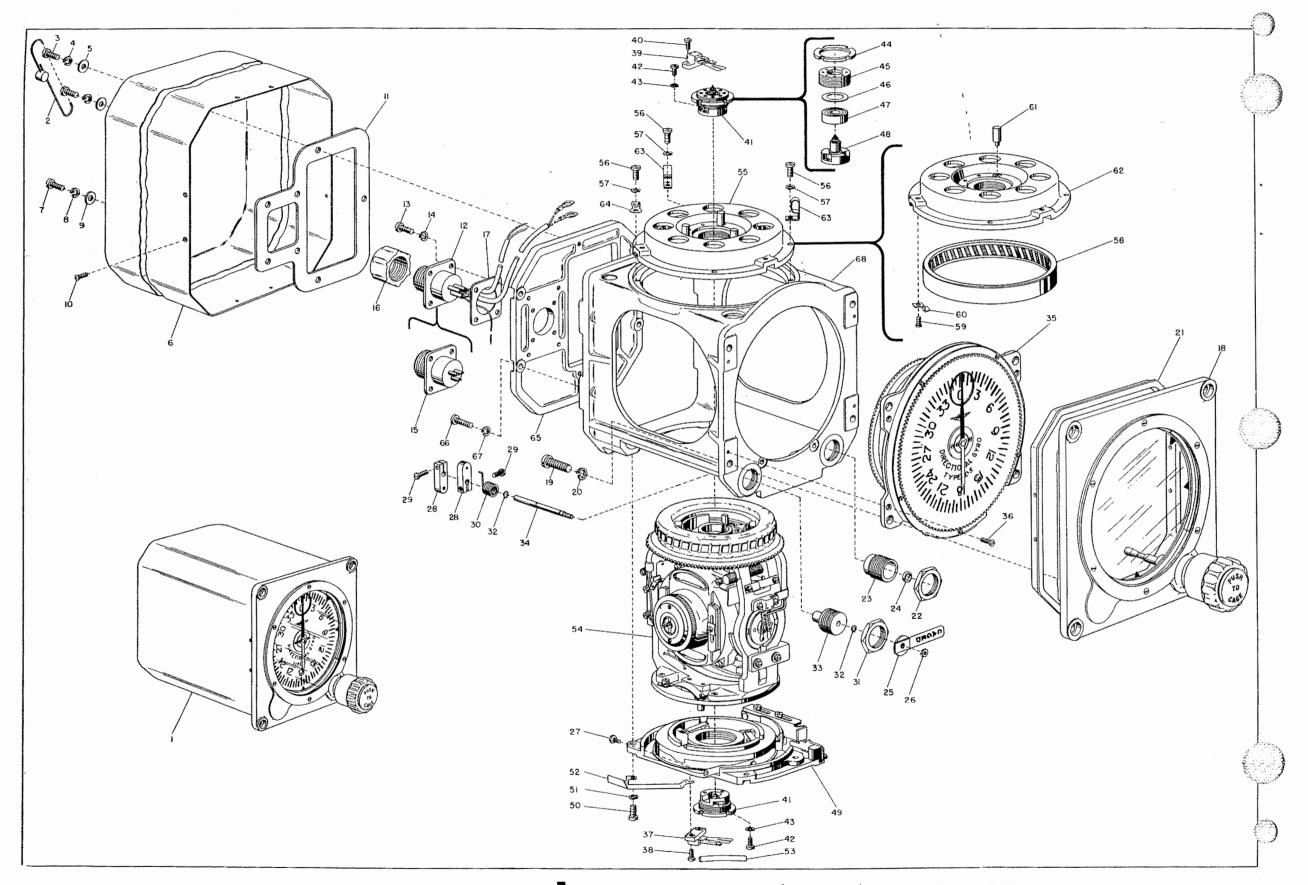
Type C-5 Directional Gyro Indicator Assembly
